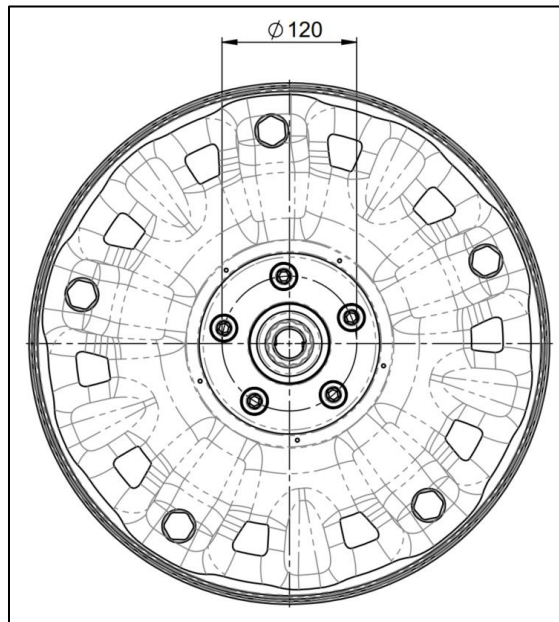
Rim mounting feature; Bearing PCD = 5x120
